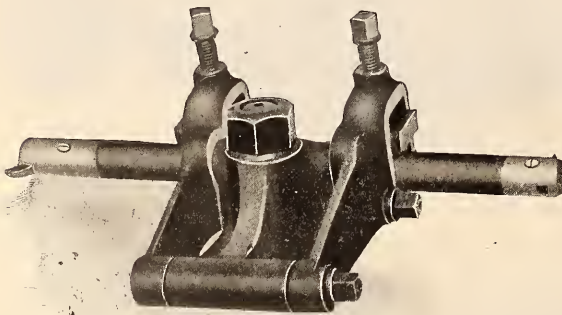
ADJUSTABLE BORING TOOL HOLDER FOR LATHE WORK.
